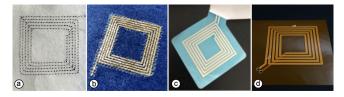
Exploration of fabrication techniques: a) embroidered conductive yarn on the fabrics; b) heat transferring a vinyl-cut copper sheet onto the fabrics; c) printed silver nanoparticle ink on a thermoplastic sheet, which can be affixed to the fabrics with heat; d) flexible printed circuit board.
